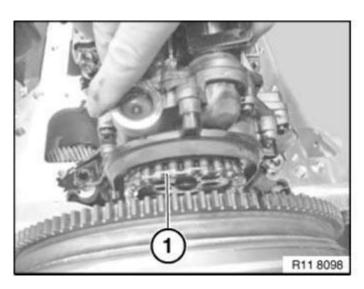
Identifying Chain Drive Courtesy of BMW OF NORTH AMERICA, INC.
